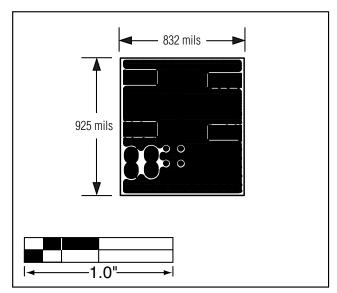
MAX2648 EV Kit PC Board Layout—Solder Side
